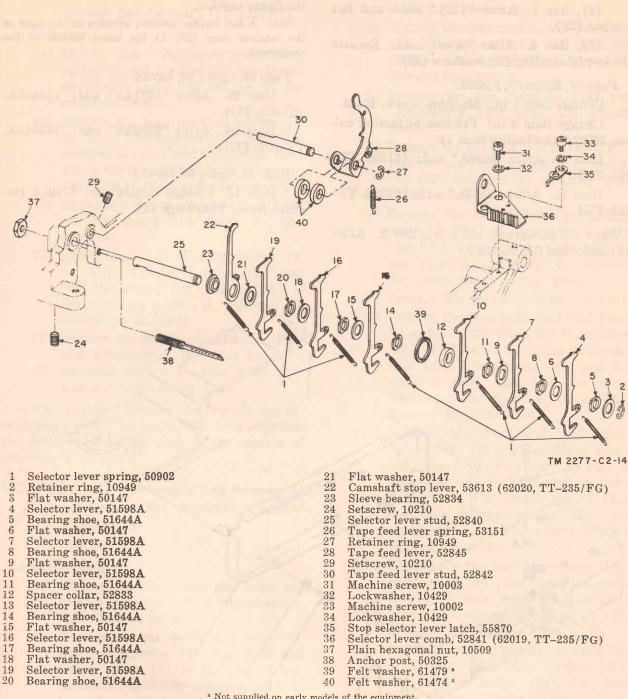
(Superseded) Tape transmitter operating levers, exploded view.
